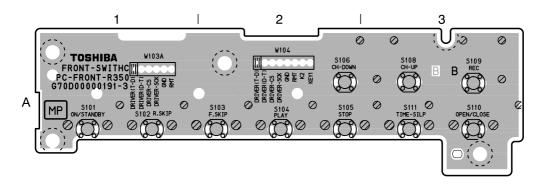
EU03B Front (L) PC Broad (Top side)
